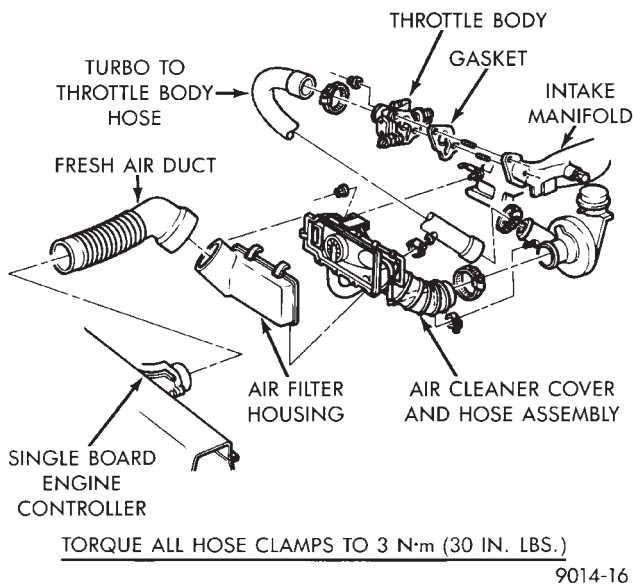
Air Cleaner and Throttle Body Assembly—Turbo I Engine
